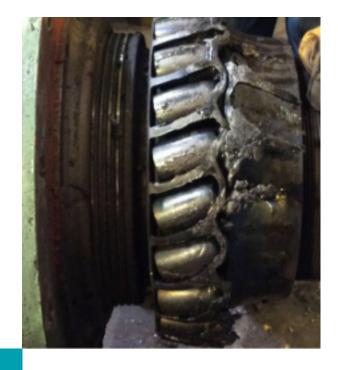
Queen roll bearing cage failed due to lack of lubrication
